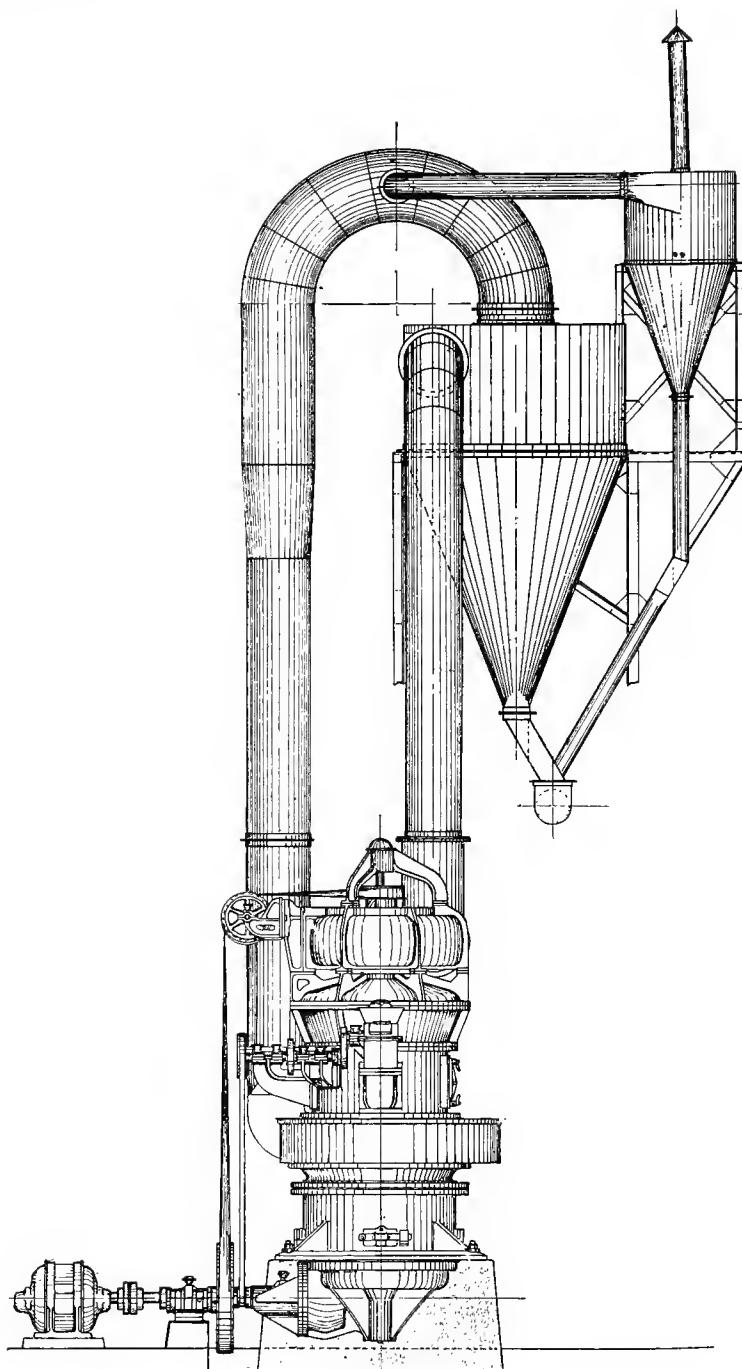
FULLER MILL ADOPTED FOR THE MILWAUKEE SUPER-POWER
